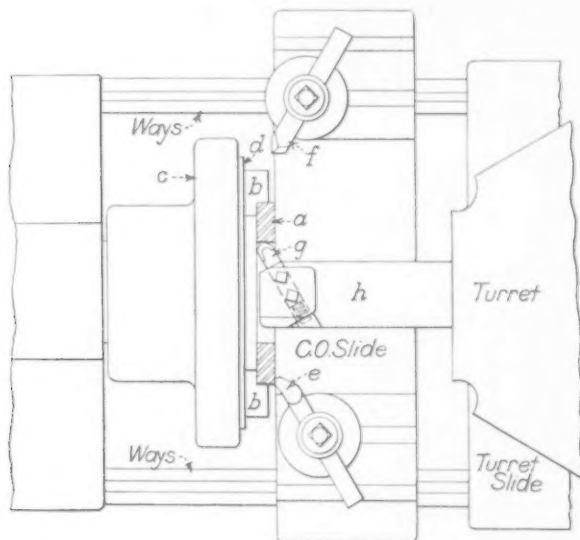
The Tool Layout for Boring, Reaming and Facing Plate Washers
